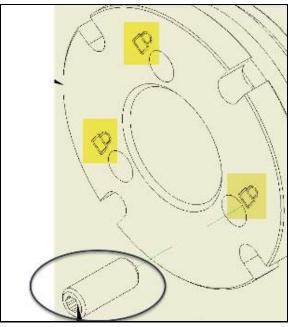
LOCKING SYMBOLS ON END CAP
